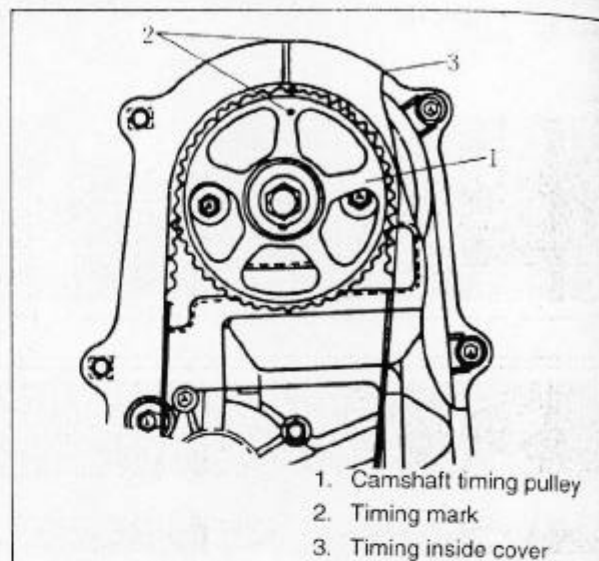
A—26 TIMING MARK(CAMSHAFT)
